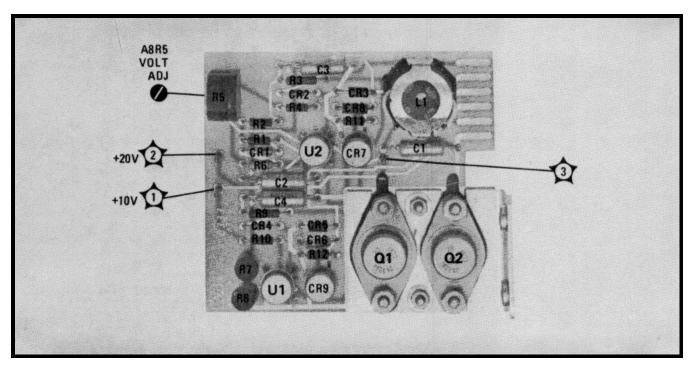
+10/+20 Volt Power Supply Assembly A8
